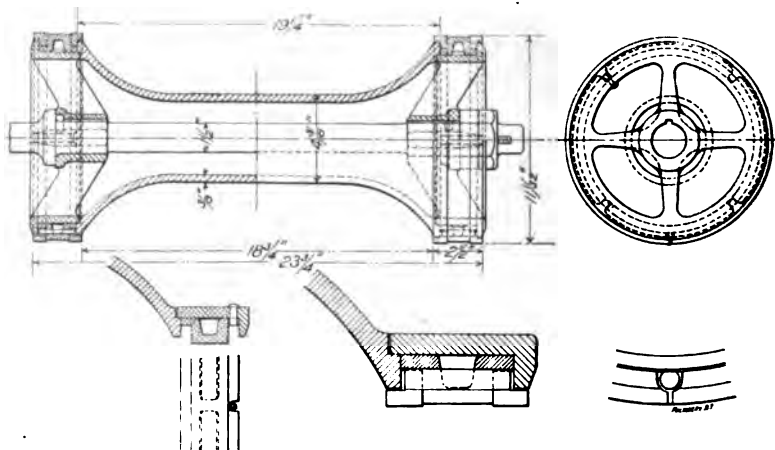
Piston Valve for Express Passenger Locomotive, Atlantic Type.
